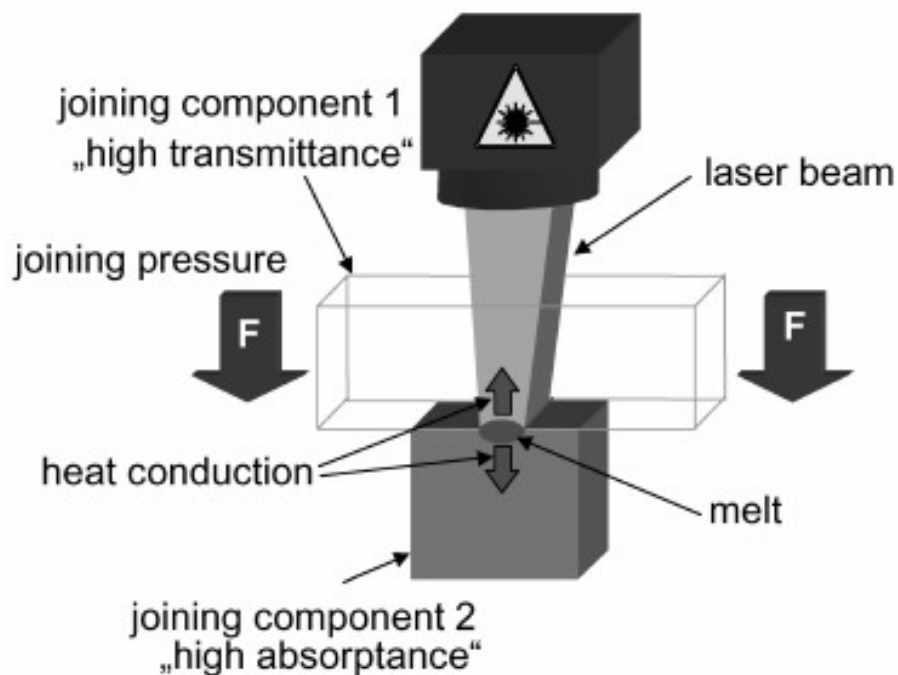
Laser Transmission Welding (Haberstroh, 2003)
